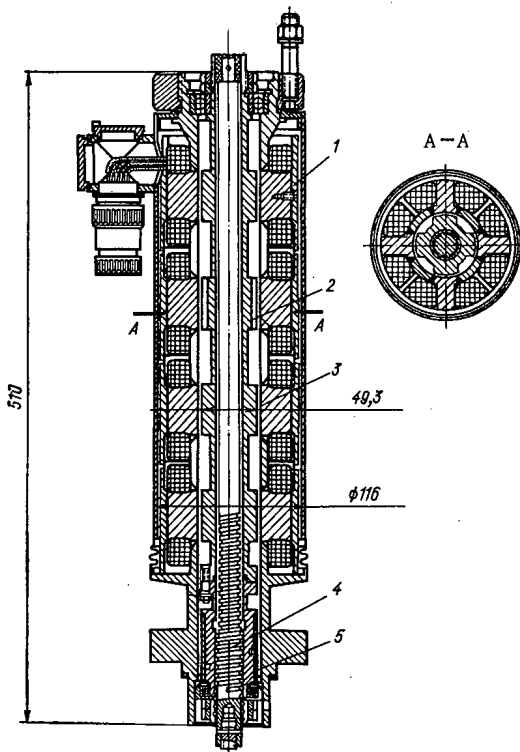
General view of SM-2 reactor shim rod power drive mechanism: 1) stator; 2) rotor; 3) pressure-tight jacket; 4) screw; 5) ball nut.
